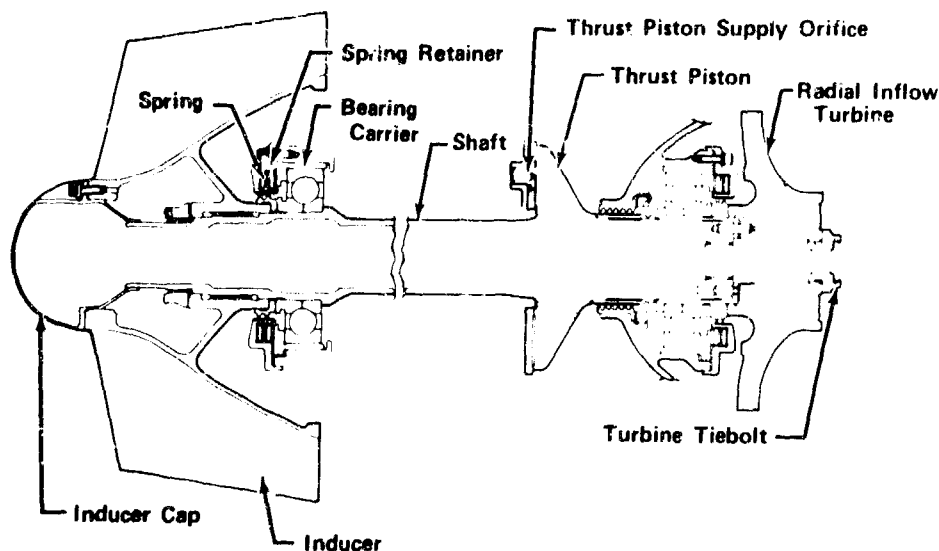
Oxidizer Low-Speed Inducer Rotor Assembly
